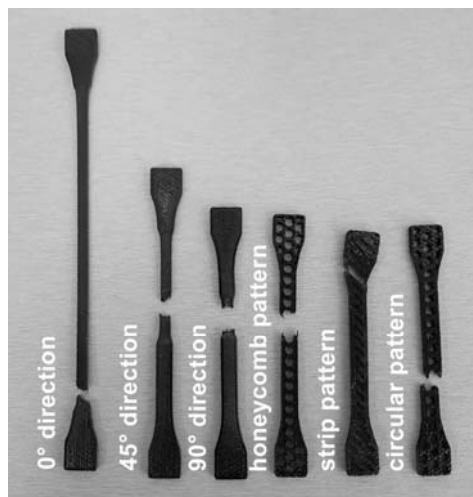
Fracture mode of 3D-printed PETG samples.
